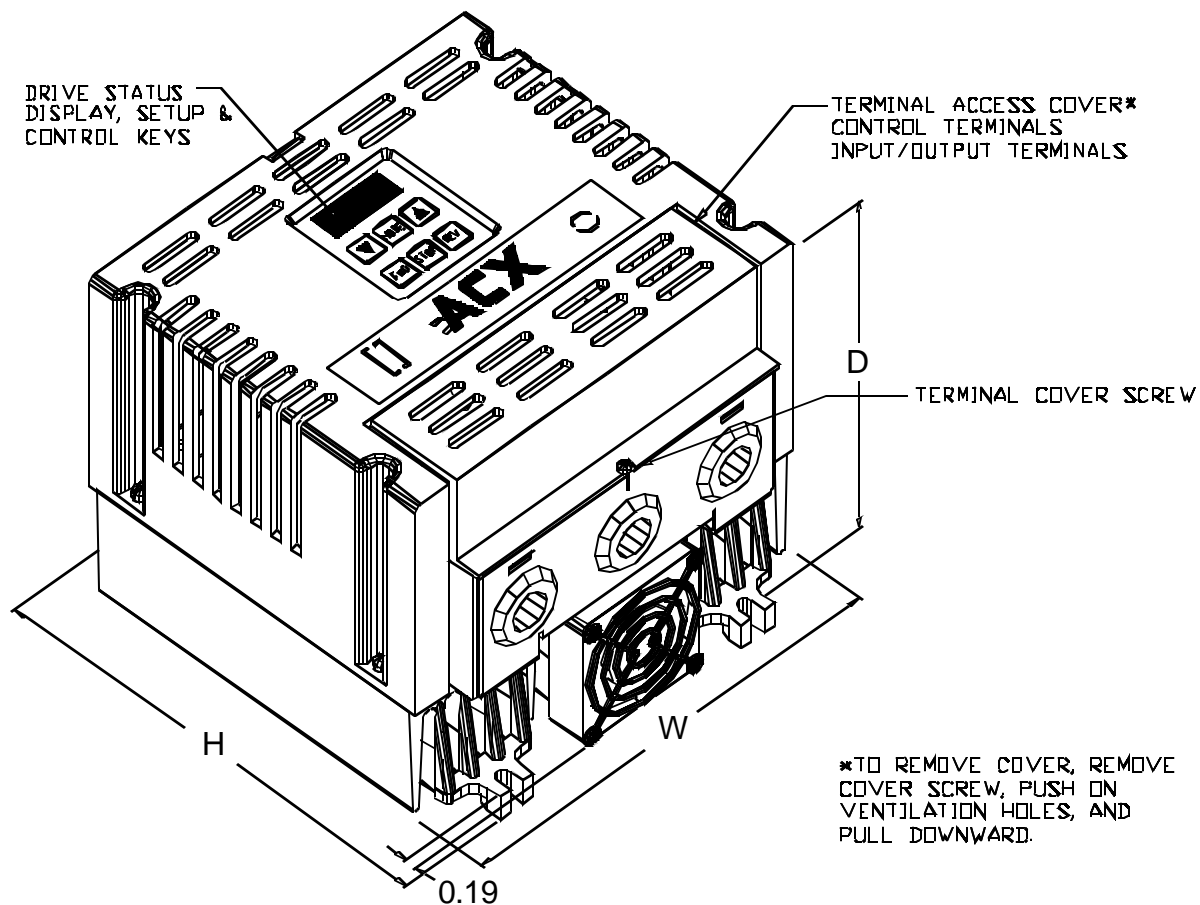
DIMENSIONS, 1/6 - 1HP, 230V CONTROLLERS
